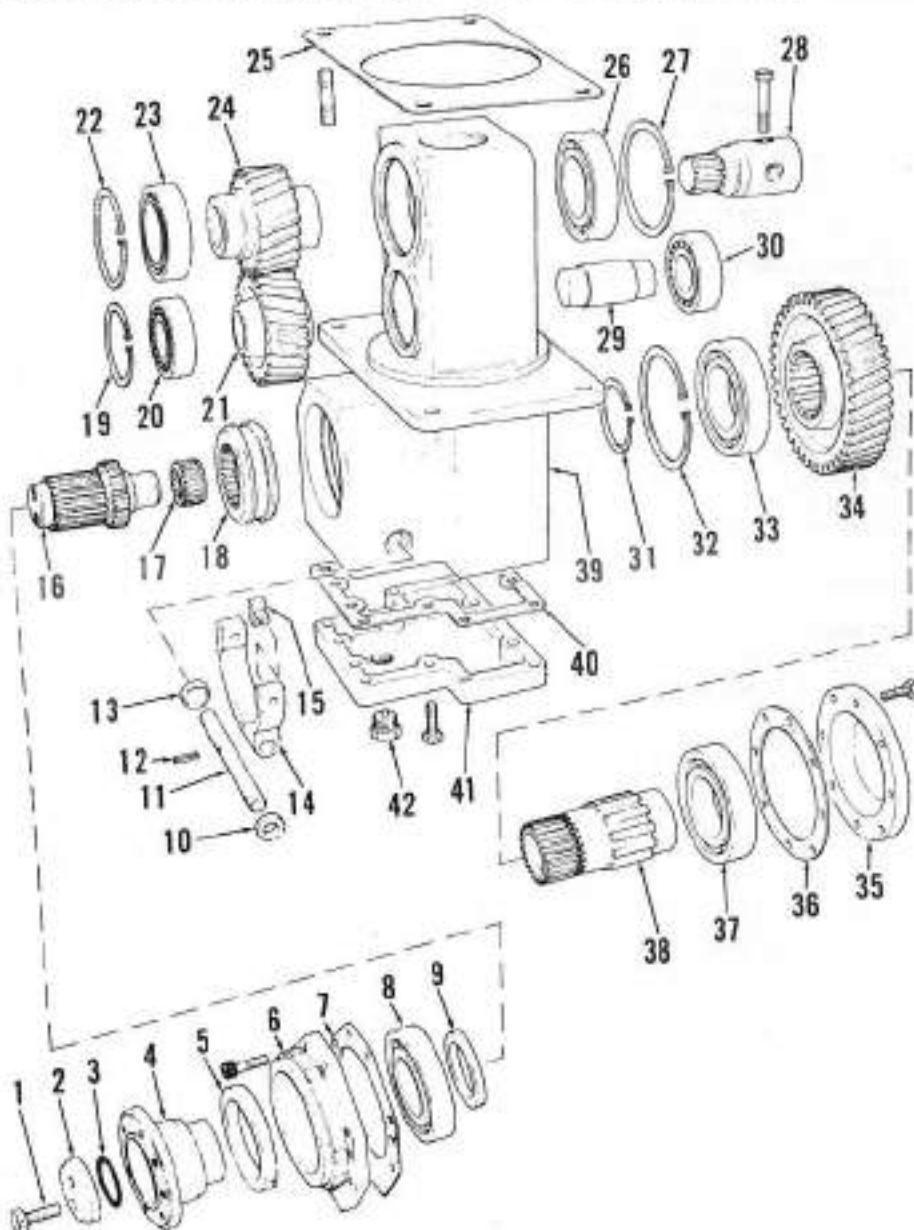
Exploded view of transfer gearbox showing component parts and their relative positions. Also see Fig. 16.
